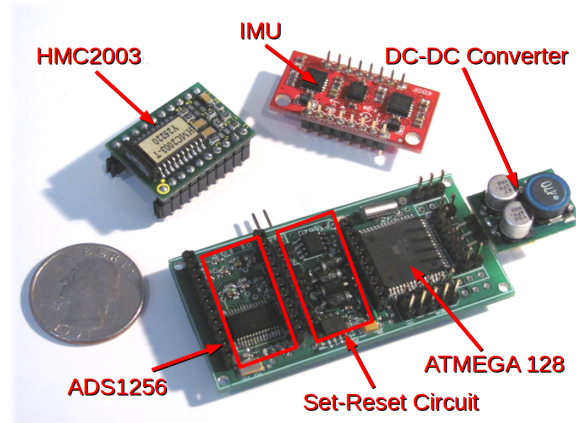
Exploded-view of GOSHAWK sensing board.
